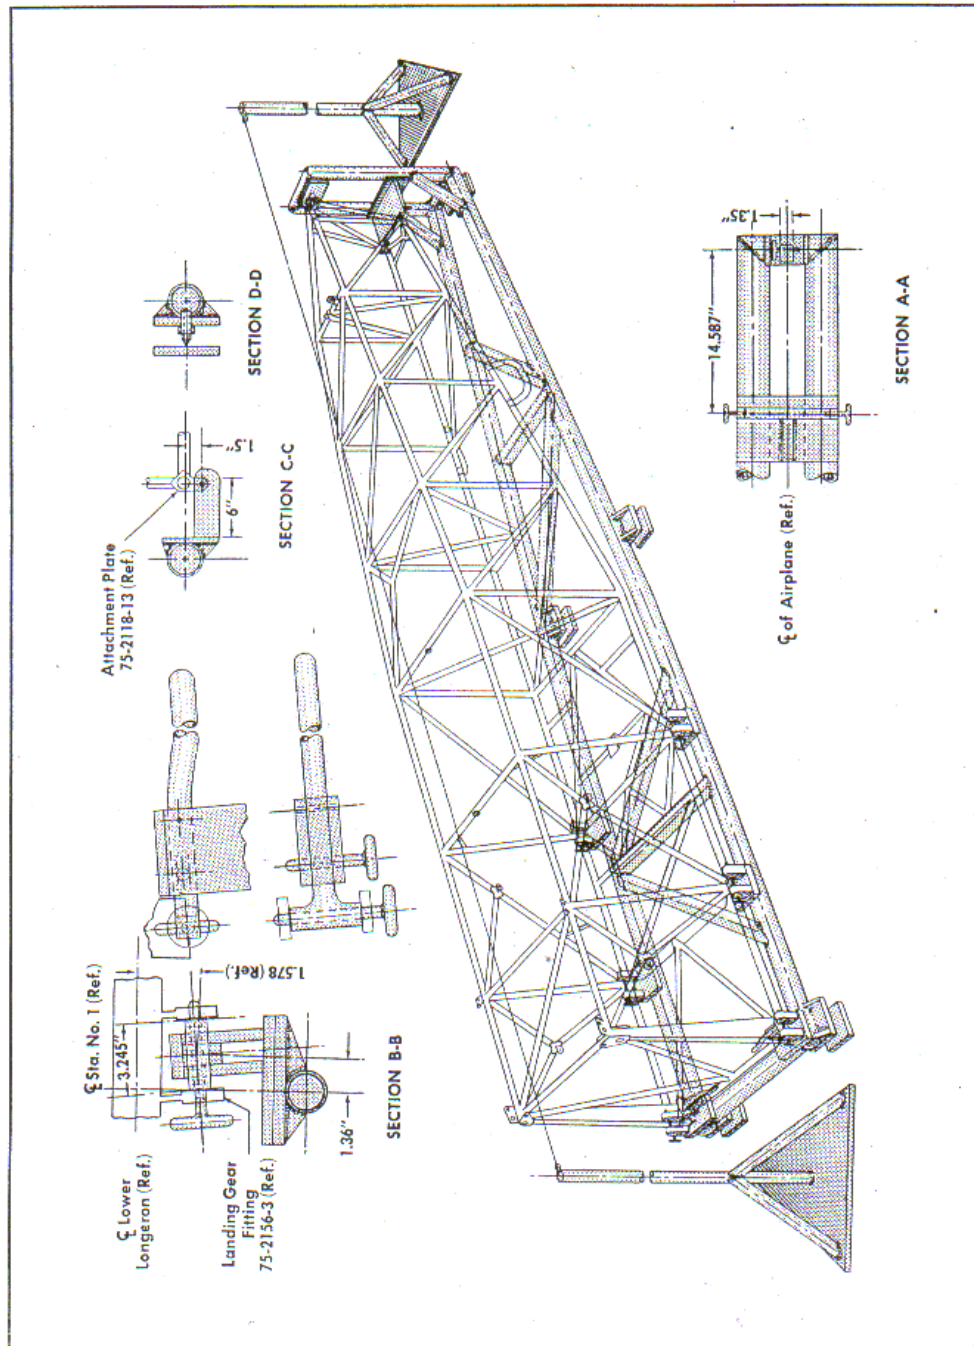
(Sheet 2 of 2 Sheets)—Fuselage Repair Jig
